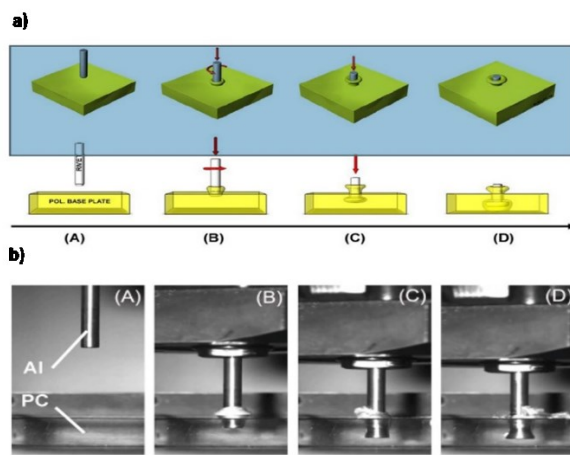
Schematic; (b) Actual Friction Riveting Process Steps for Metallic Insert Type Joints. [4, 7]
